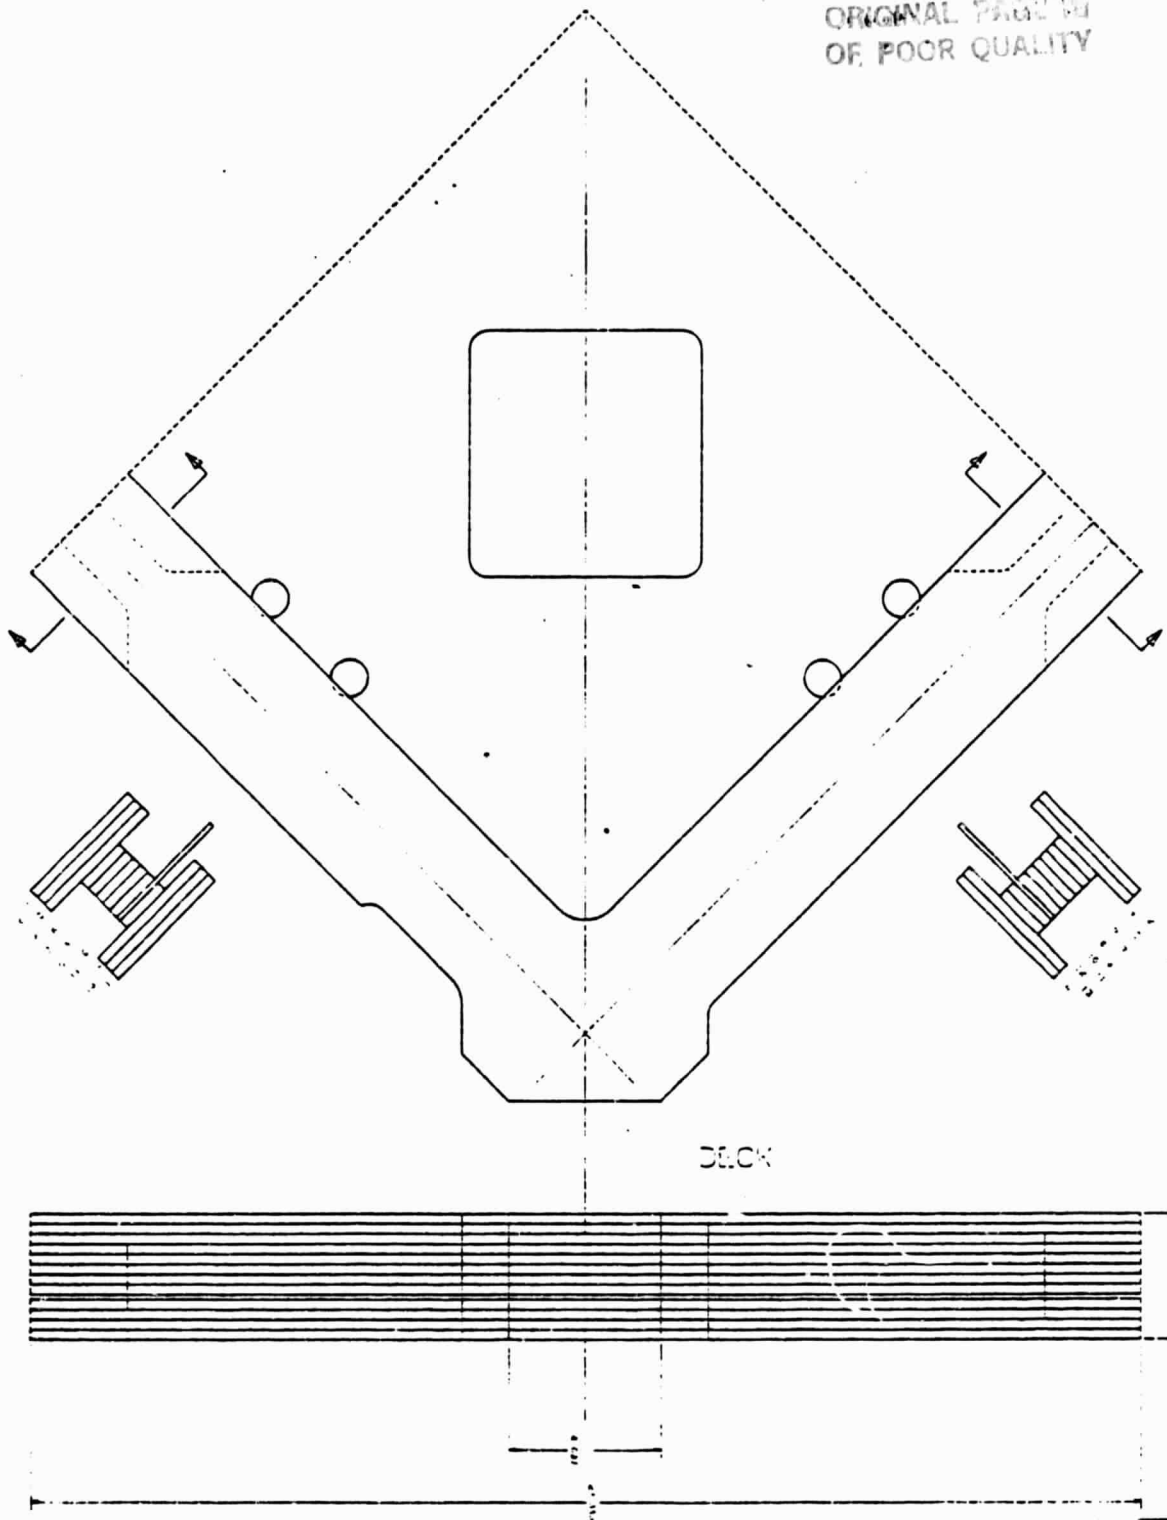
CADAM Drawing of a Corner Section of the Peripheral Beam.
